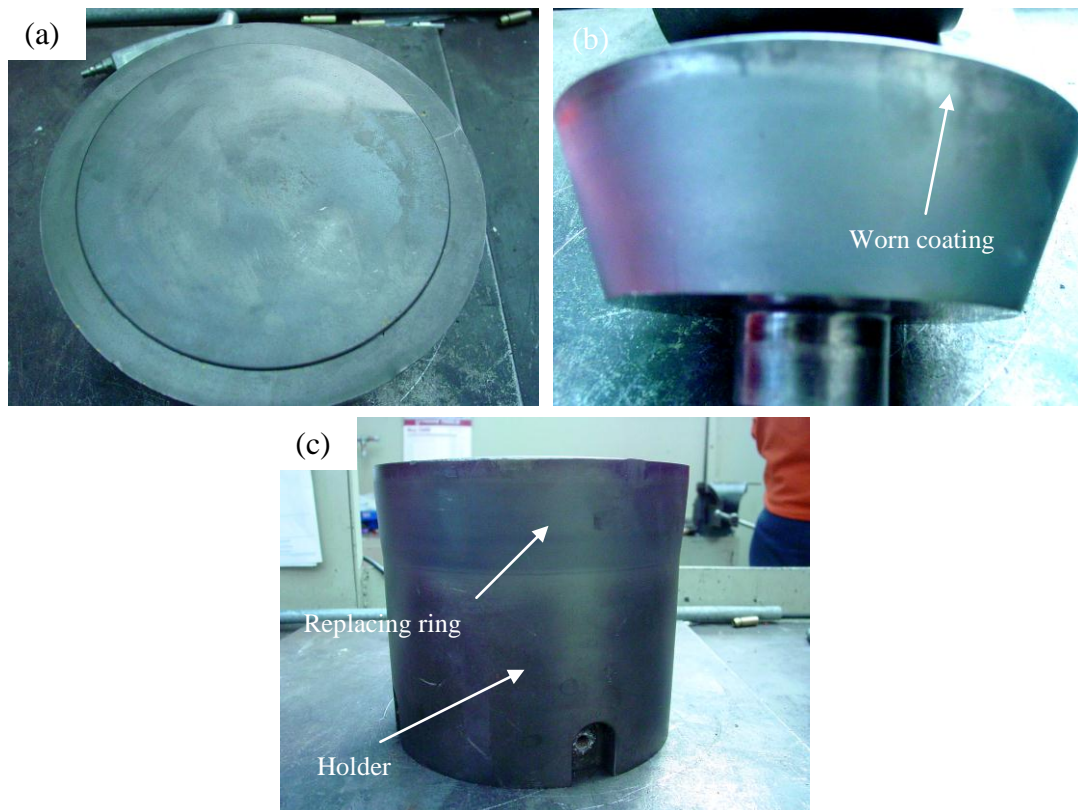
Photographs of the coated dummy block after 61 hours operation and after cleaning with NaOH (a) top surface view (b) mandrel side view and (c) replaceable ring with holder (side view)
